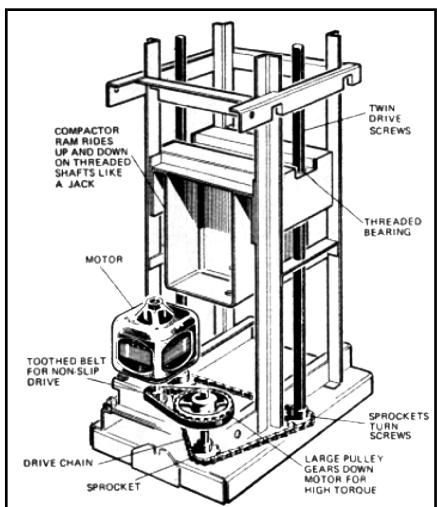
Internal drawing of GU-1800 compactor mechanism. View is from the rear, where the motor is located the motor.
